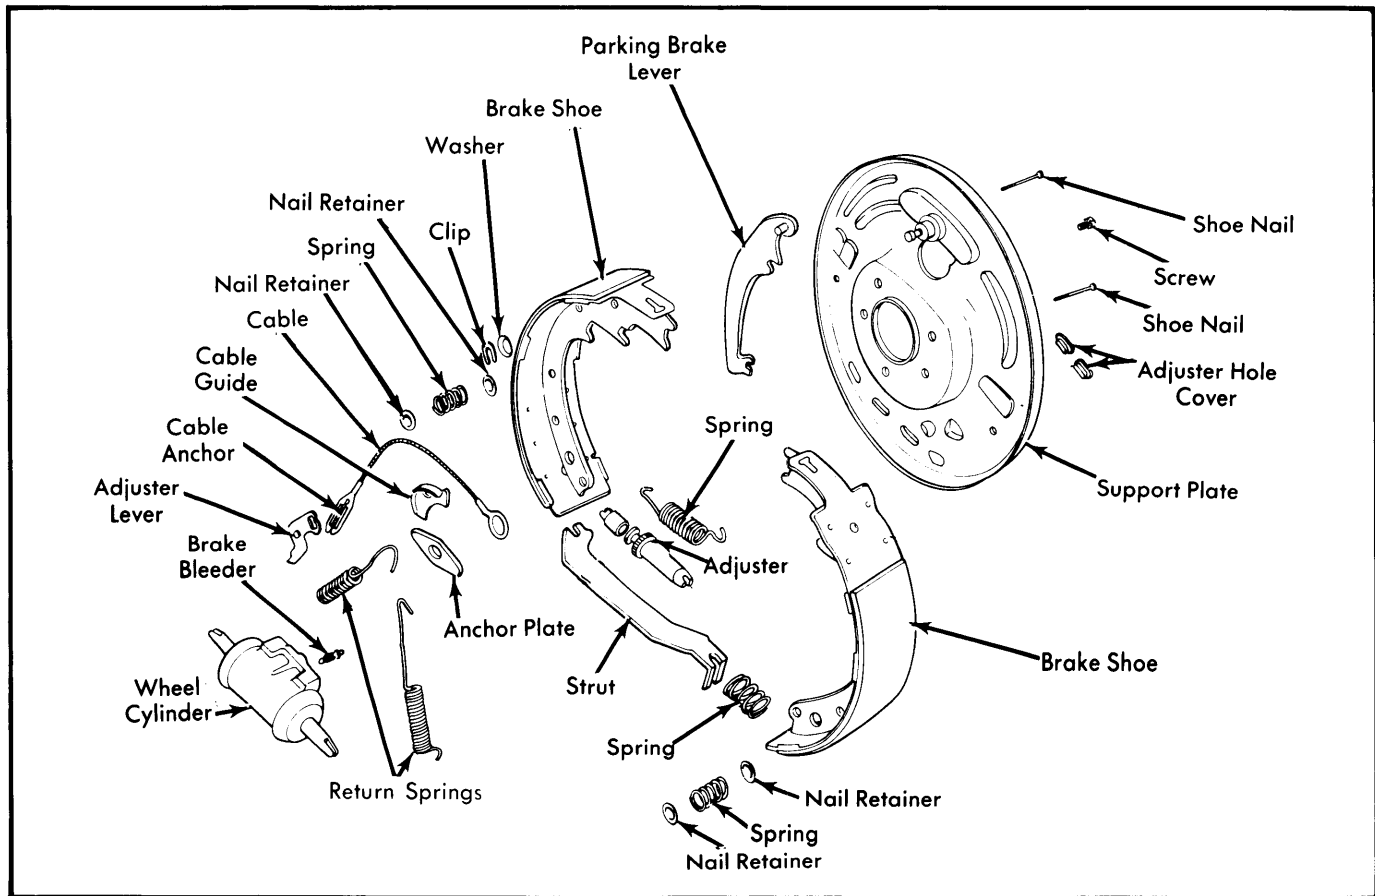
Exploded View of Chrysler Type Brake Assembly
